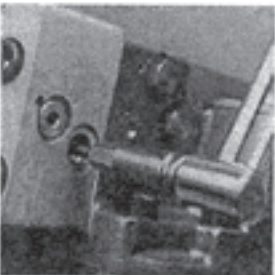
Torque Servo Pressure Shuttle Ball Seat
